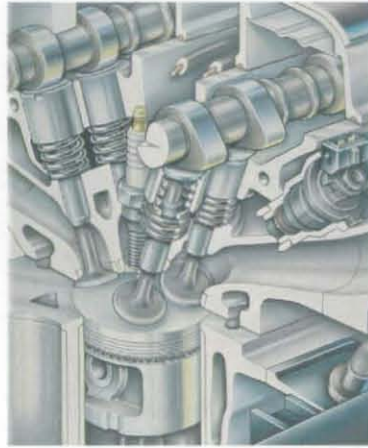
Zetec-SE 16-Valves Cylinder Head Assembly
